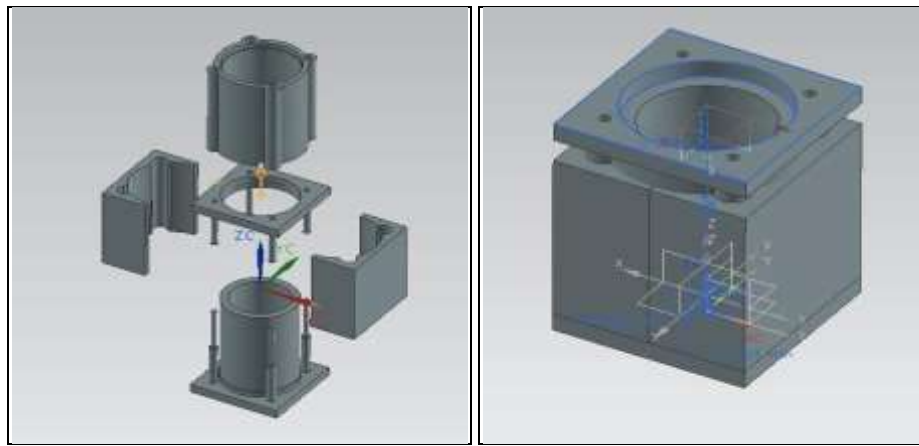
Exploded View of and total assembly of Inline Boxer Motor
